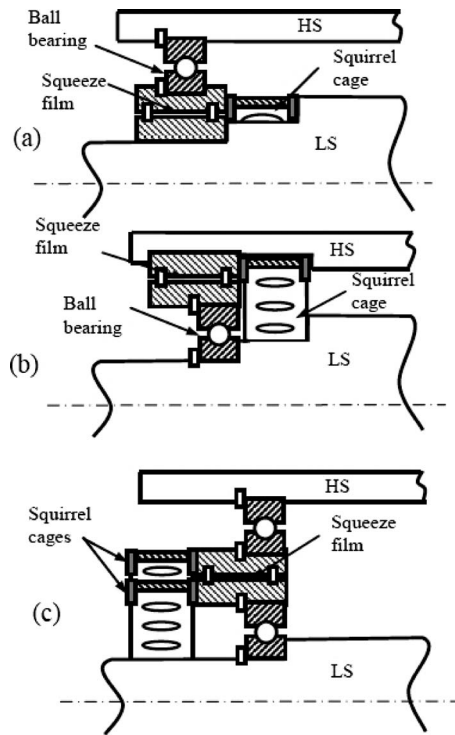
Schematic view of intershaft damper configurations: (a) squeeze film rotates with low speed (LS) rotor, (b) squeeze film rotates with pressure high speed (HS) rotor, and (c) double ball bearing-squirrel cage design. Reproduced from Ref. [6].
